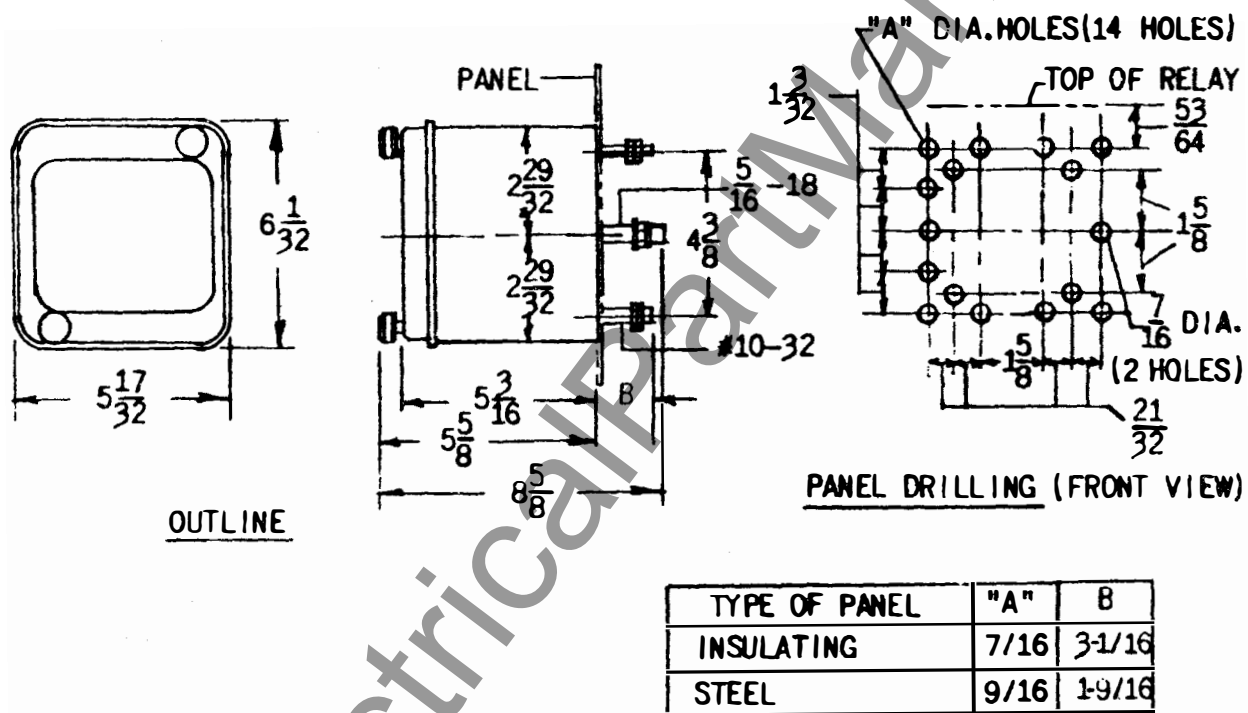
(459A231Sh.1 [9]) Outline and Panel-Drilling Dimensions for HFA53 Surface-Mounted Relays (Typical Model Number is HFA53B(-))
